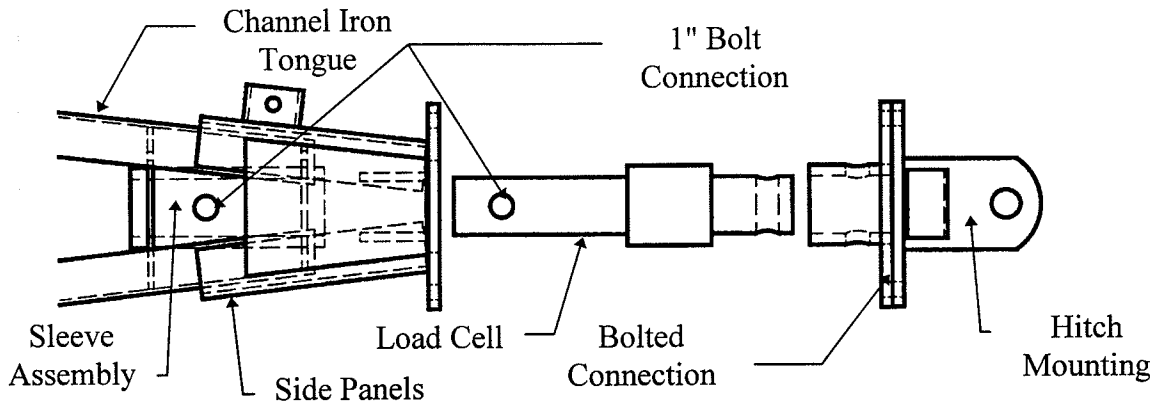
Exploded top view of the spreader's modified hitch with load cell.
